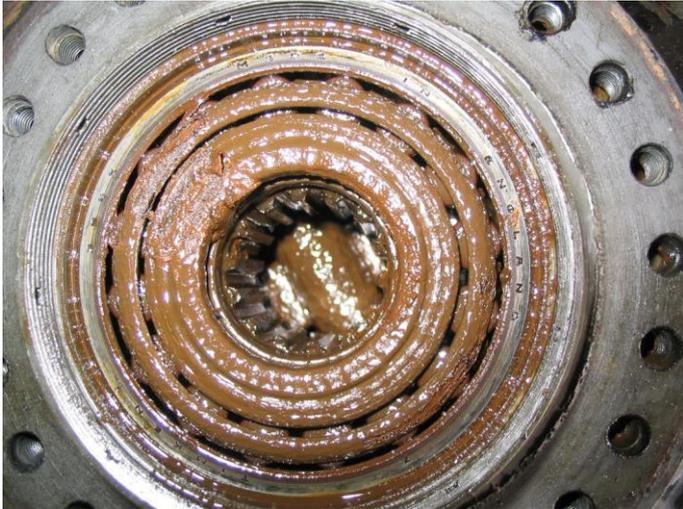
Clearly, the view through the left hand side shows this axle to be in trouble. At this stage of the game you should not be asking why? Counting the splines on the bevel gear shows this axle to be a Bentley S1 type before B590 FA.
